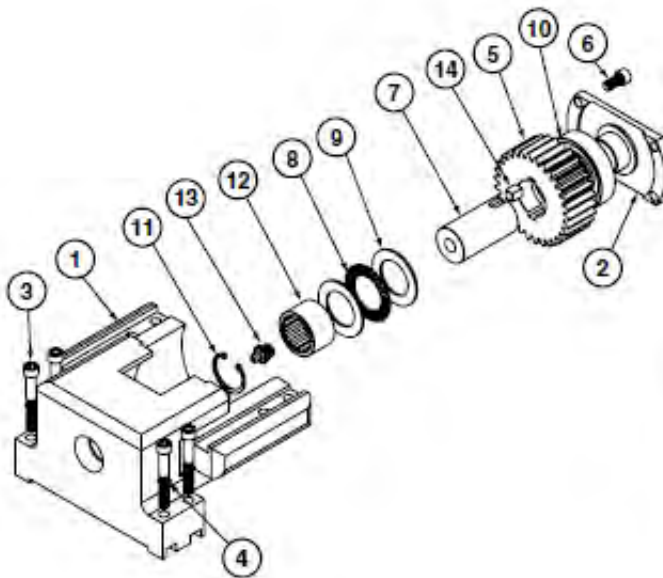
CHARLYN HYDRAULIC MOTOR ASSEMBLY (P/N HYC-R)
